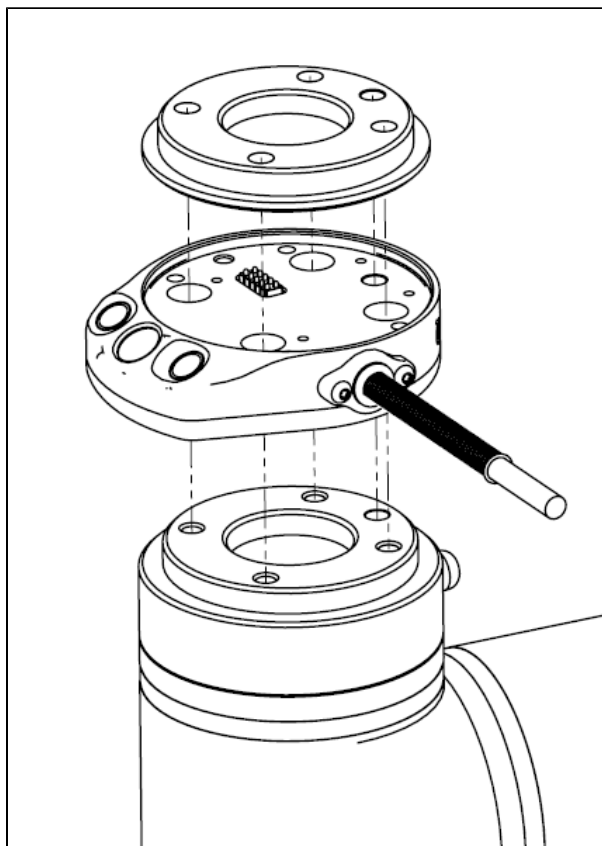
Mechanical installation of the Wrist Camera kit for Universal Robots.
